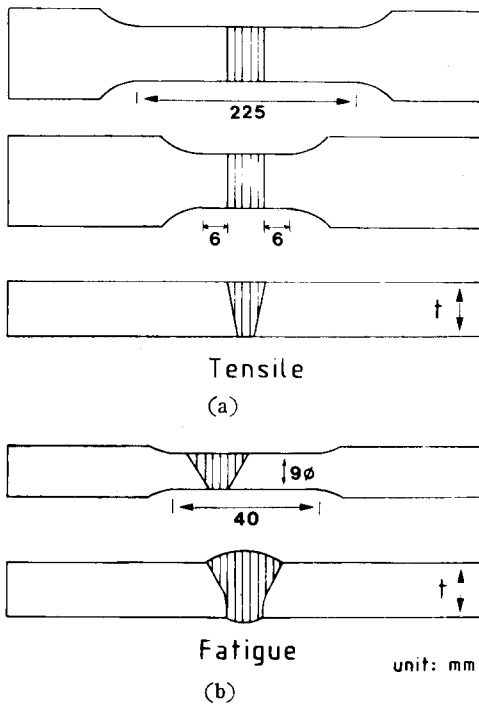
Specimen geometry of (a) tensile and (b) fatigue specimens
